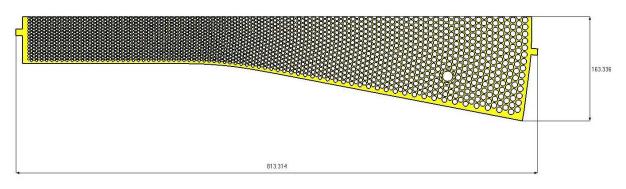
Outer skin final blank development from FASTBLANK (half-model)
